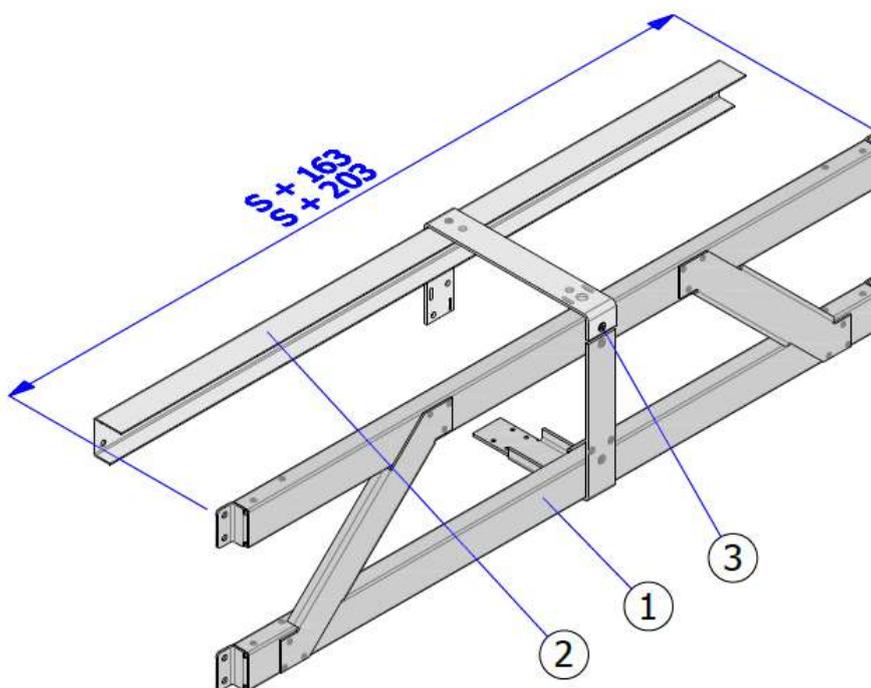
ISOiK-Ok60-01.10 [structural lattice with wall-mounted channel section]
